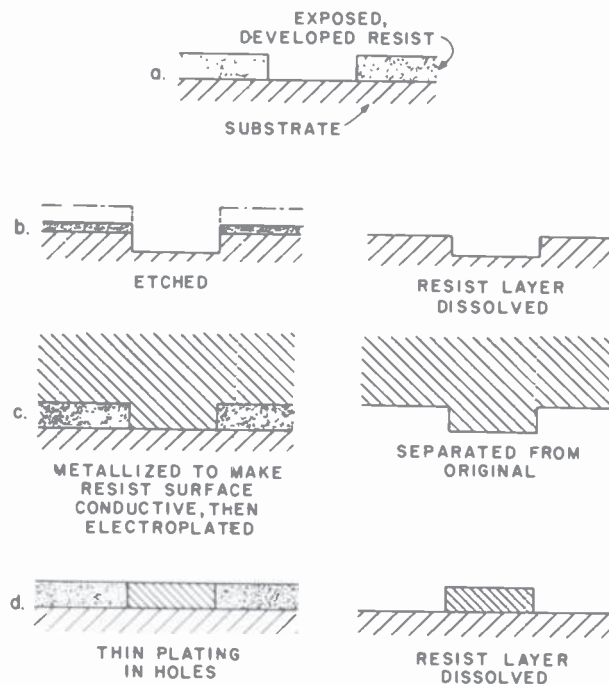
Methods for transferring a signal element hole that has been developed in a thin layer of photoresist to the metal substrate: (a) hole formed by exposure and development, (b) hole-to-hole transfer by ion etching, (c) hole-to-bump transfer by plating a thick overall layer, and (d) hole-to-bump transfer by selectively plating in the hole.
